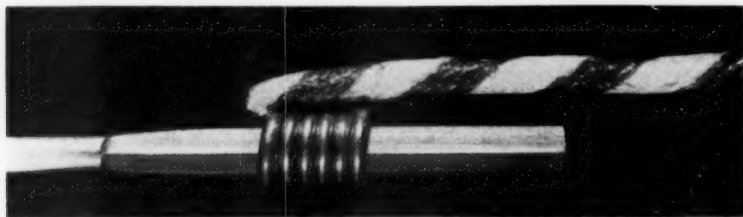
A solderless wrapped connection on a wire spring terminal.
